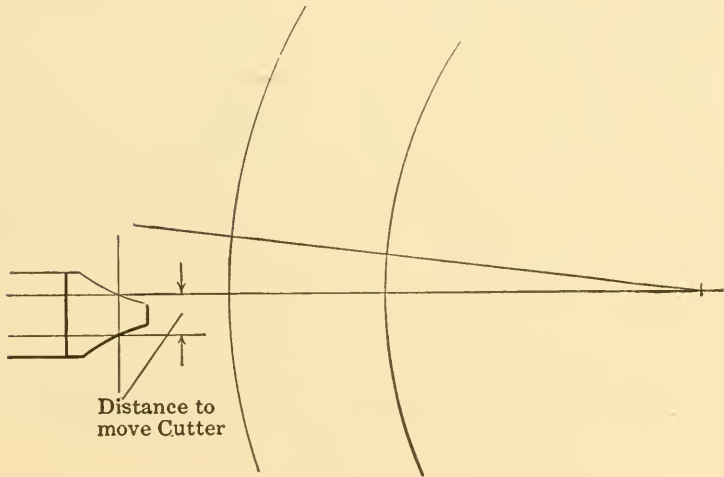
BLANK IN POSITION FOR SECOND SIDE CUT.
